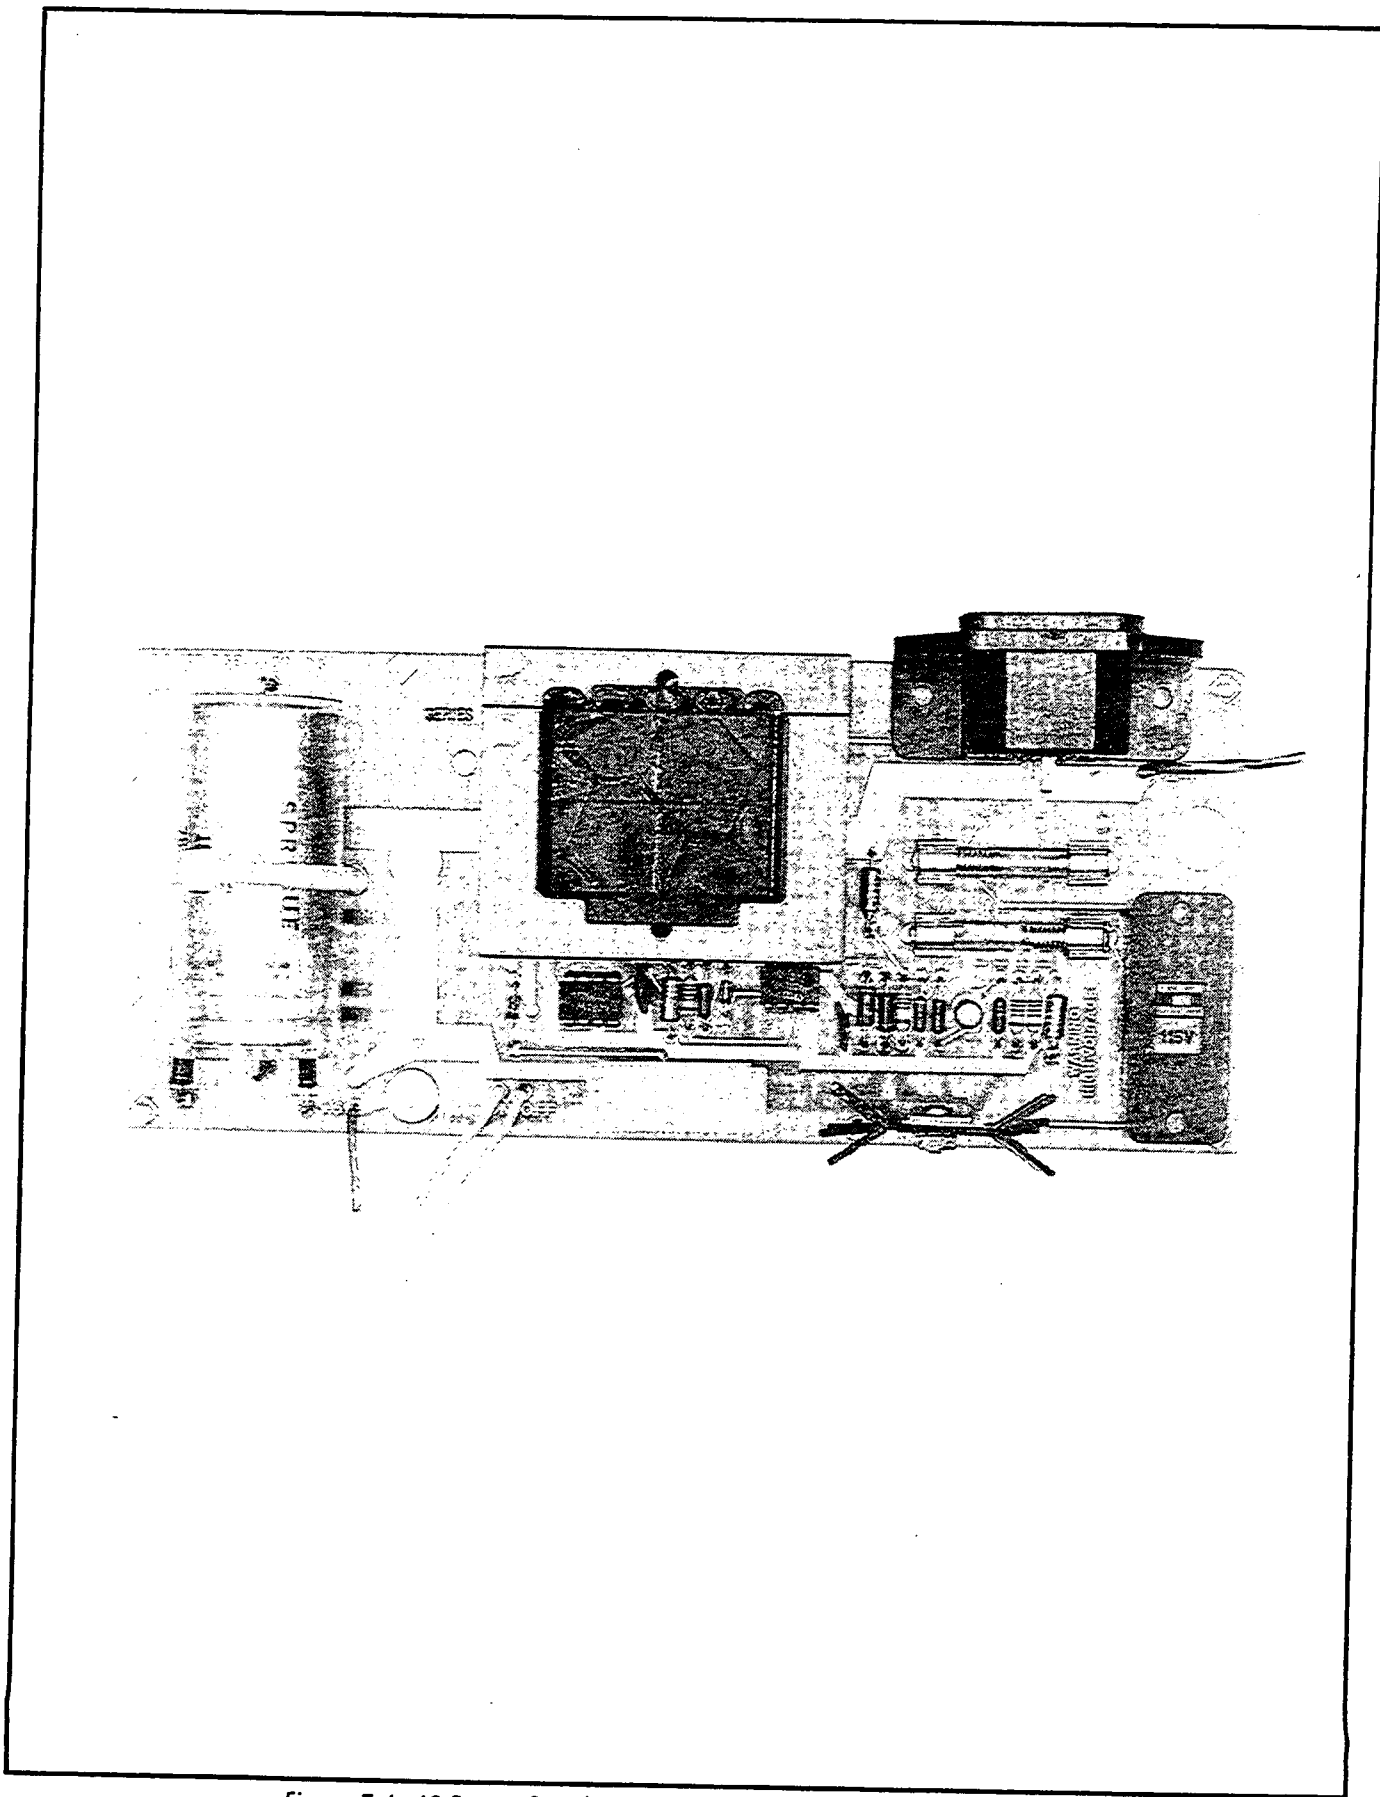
A2 Power Supply Assembly Component Locator Series 1836A
